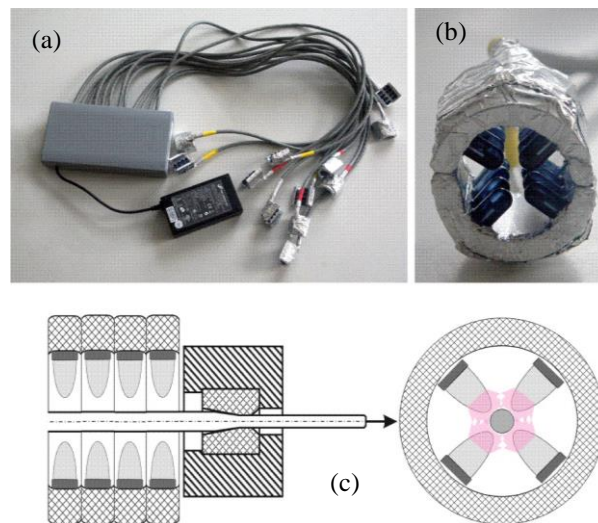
Designed IR heater for the UW drawing process: (a) general view; (b) single heating component comprising 16 LEDs, (c) outline of the suggested IR drawing process when the only surface layer is heated.
